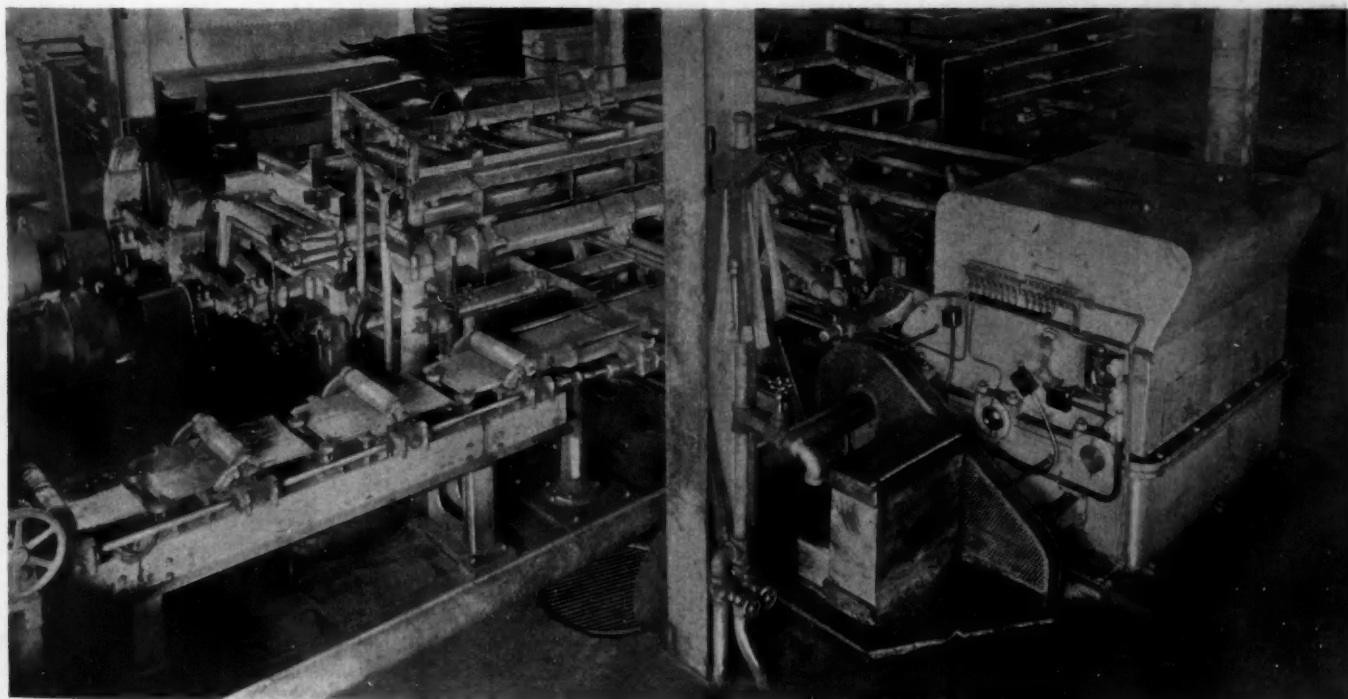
AUTOMATIC INSPECTION MACHINE FOR STRIP STEEL
